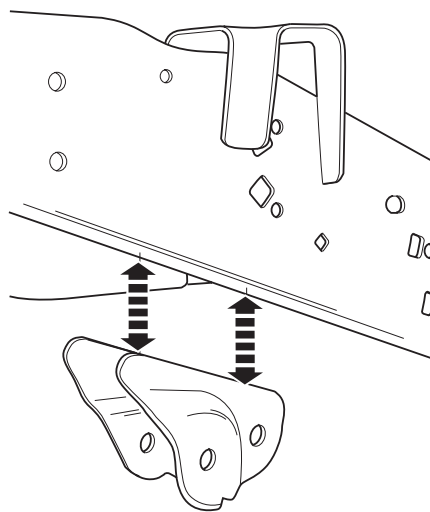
VIEW OF FRAME SHOWING REAR SPRING FRONT HANGER BRACKET REMOVAL/INSTALLATION.
